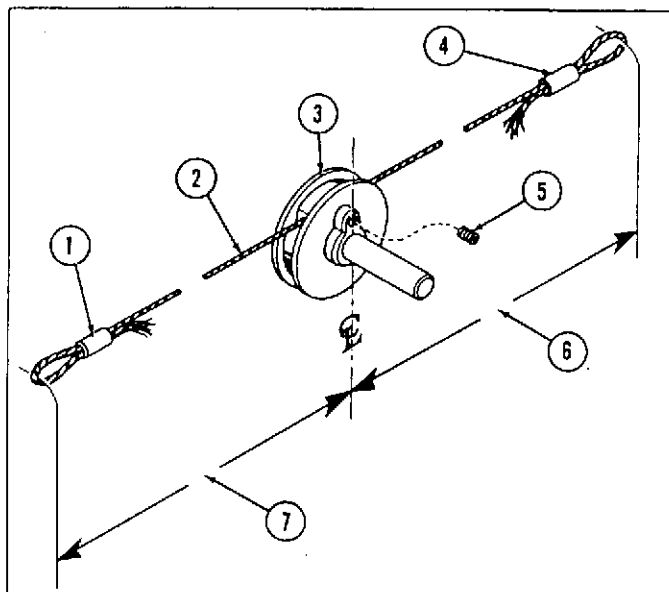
TURNTABLE CABLE AND DRIVE PULLEY
